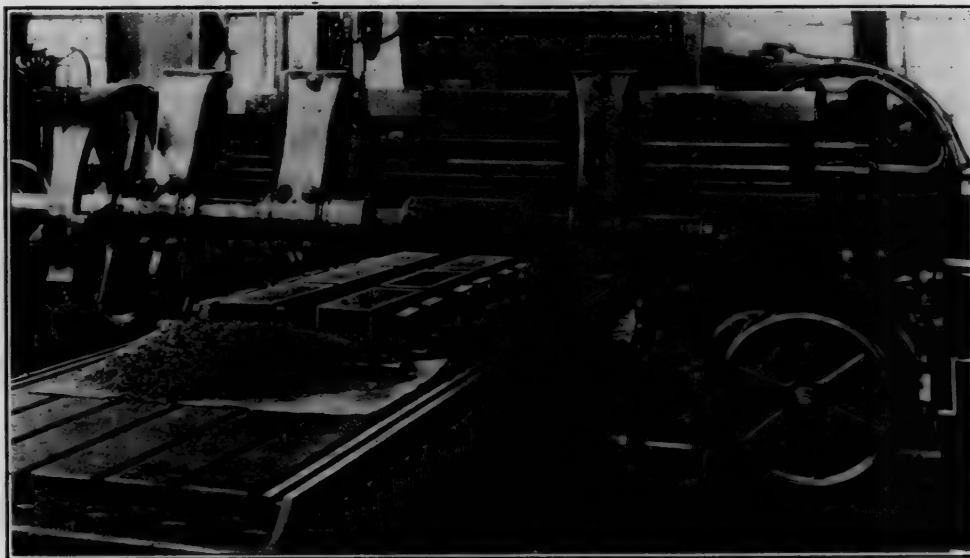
MILLING DRIVING BOX FACE OF SHOES AND WEDGES.
